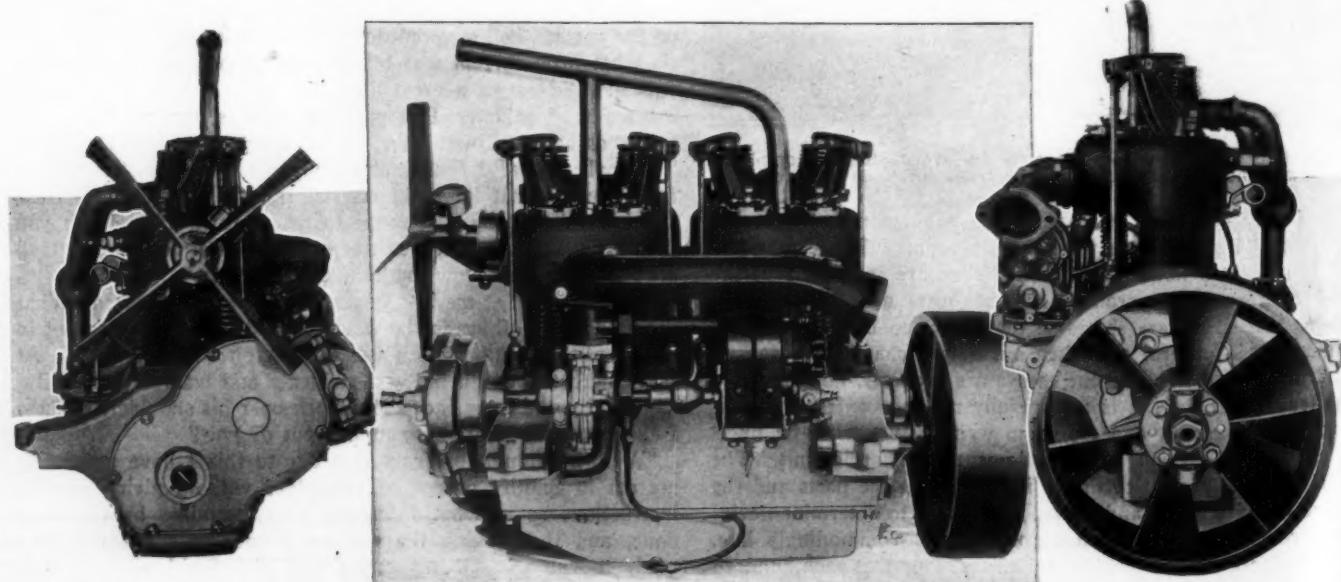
Three views of the motor showing pump and magneto on one side, and a fan in the flywheel
